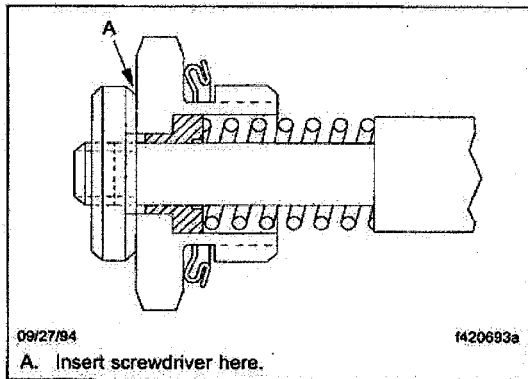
, Pull-Pawl Assembly (sectional view)
